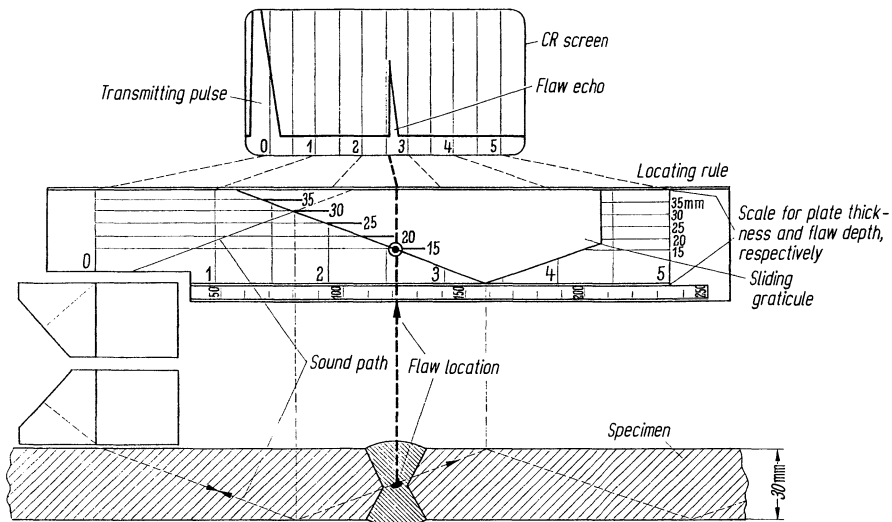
Locating flaws with the Krautkrämer locating rule for testing welded joints
